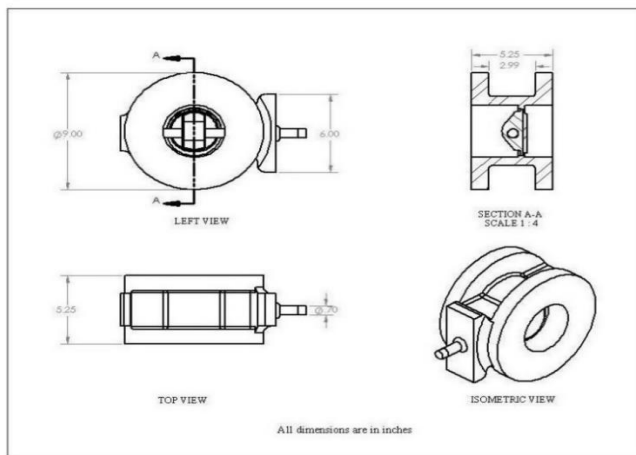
General Assembly drawing for TOBV DN 100 CLASS 150
